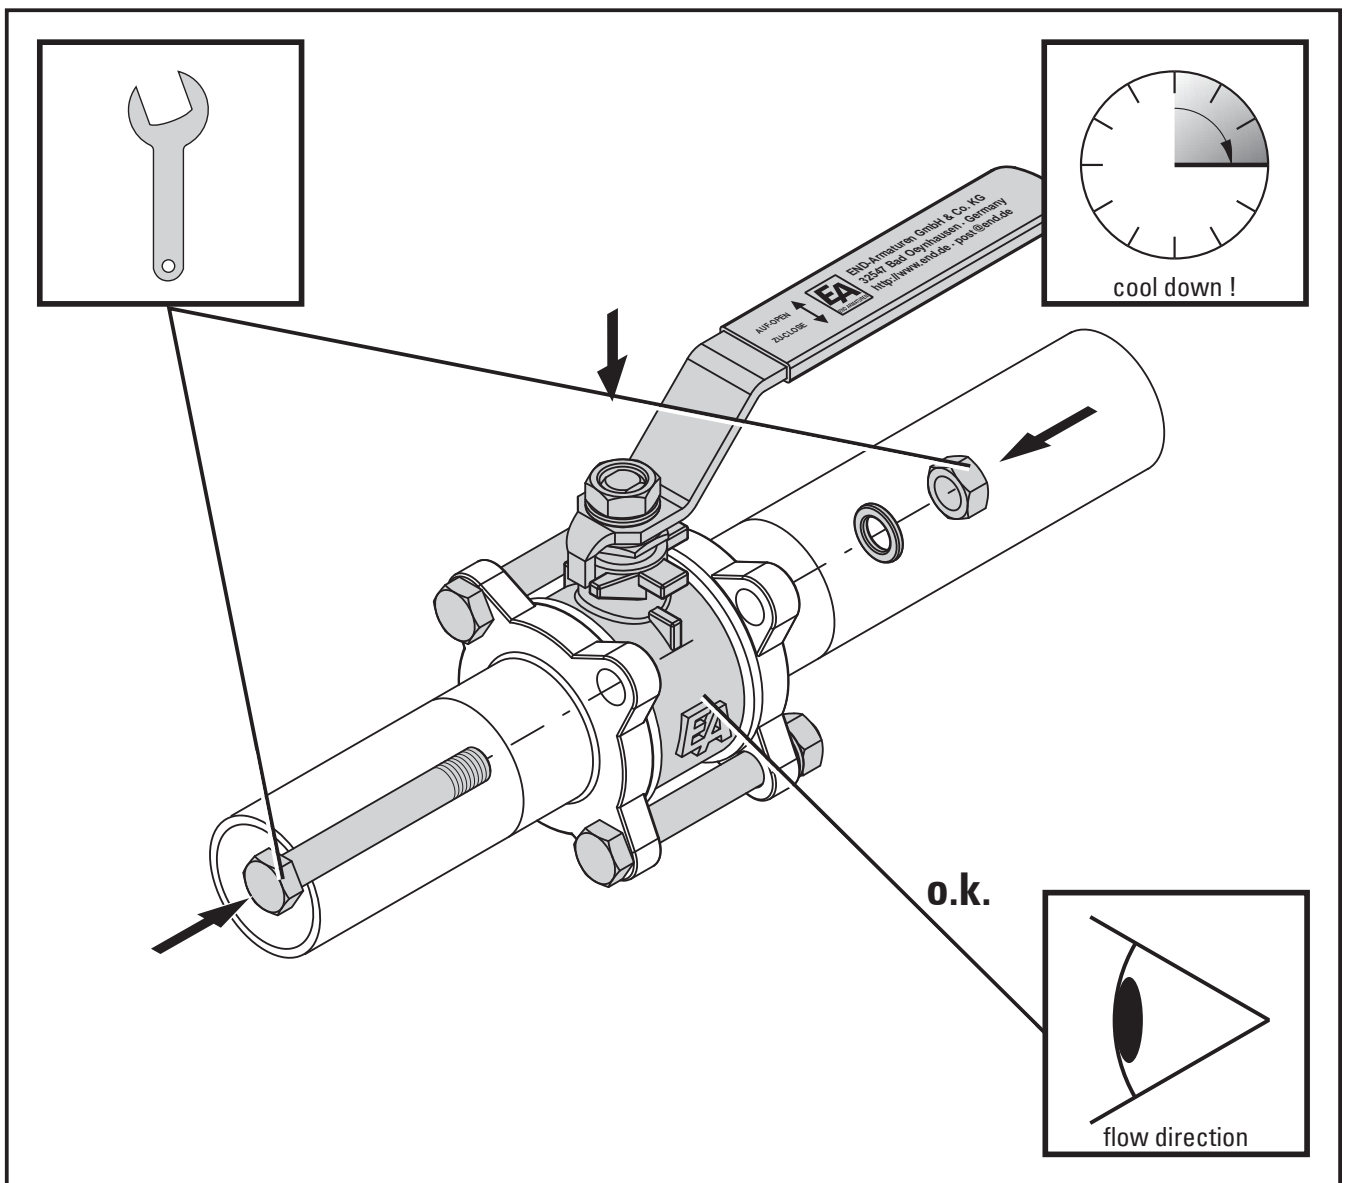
ball valves, mounting welded connections, mounting of the center part of the ball valve (Fig.: Art. ZE311064)
